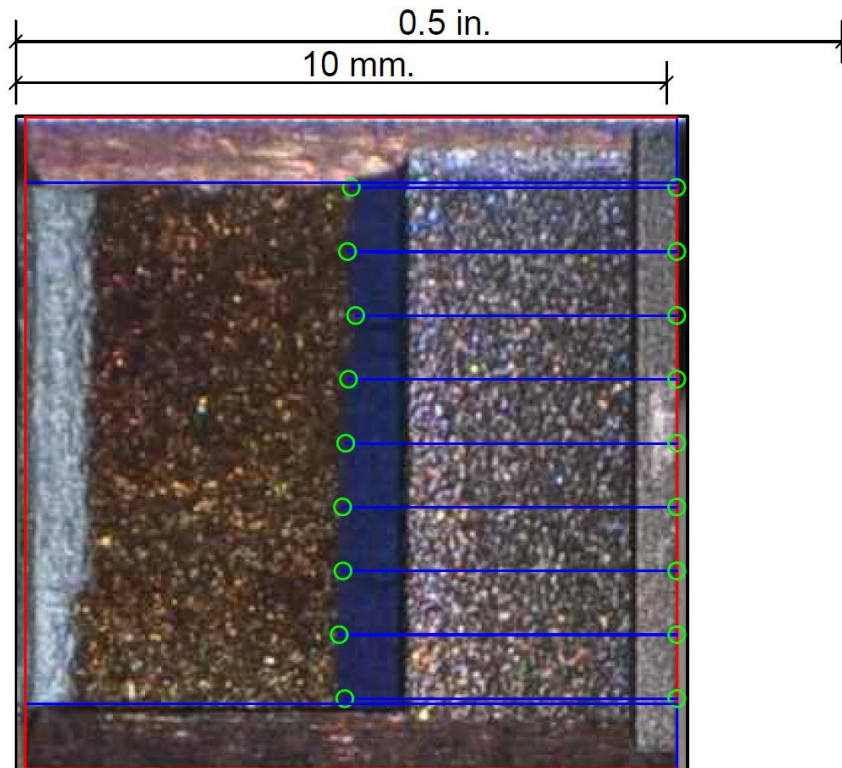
Specimen D34' Fracture Surface
